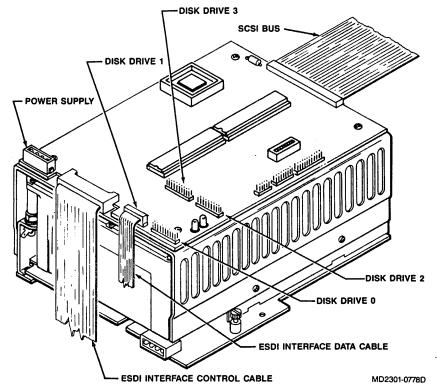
Connecting the Disk Drive Data and Control Cables and the SCSI bus to the MD2X Controller
